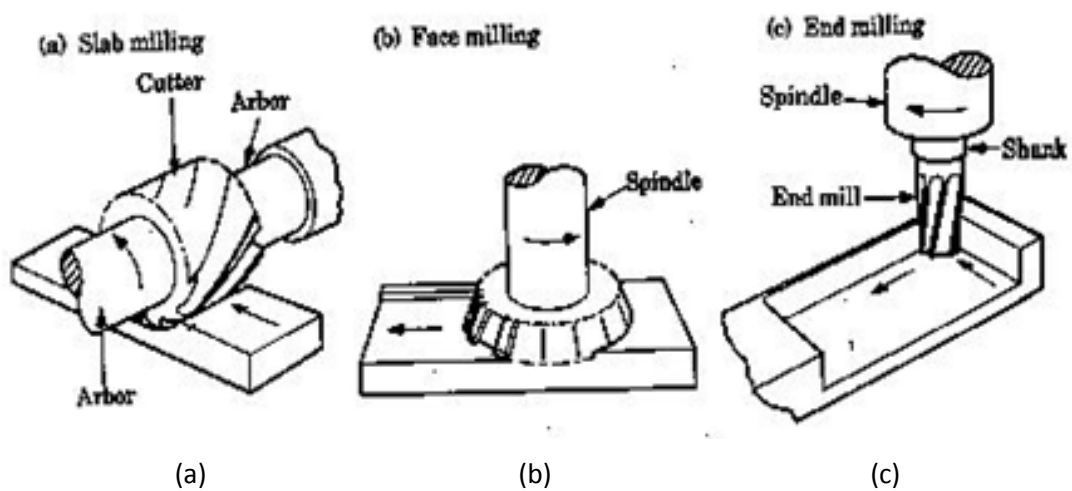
(a) Slab milling (b) face milling (c) End milling [W.2]
